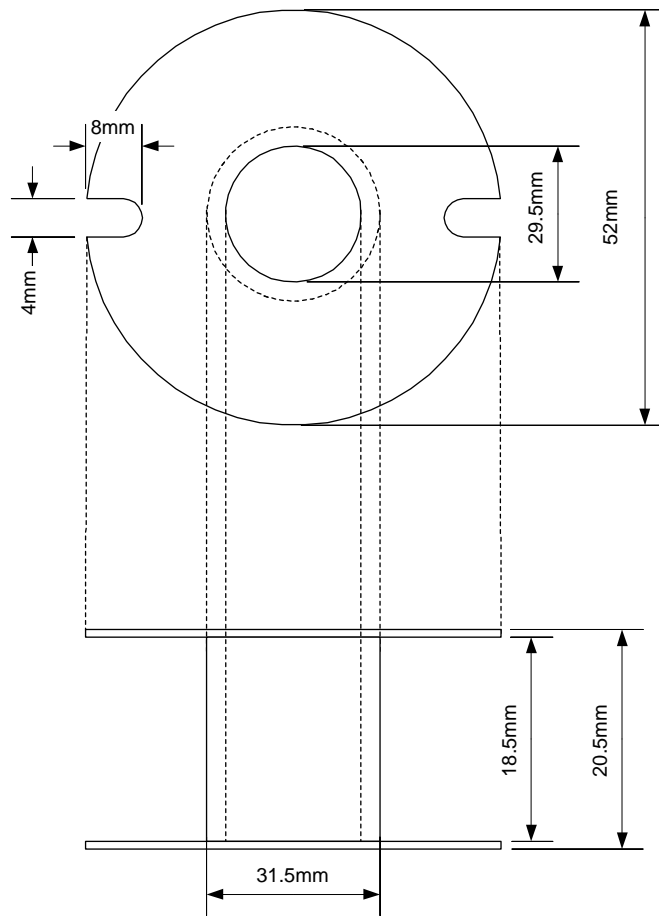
The mechanical layout of the custom made coil former used for the primary and secondary windings of the adjacent windings arrangement.
